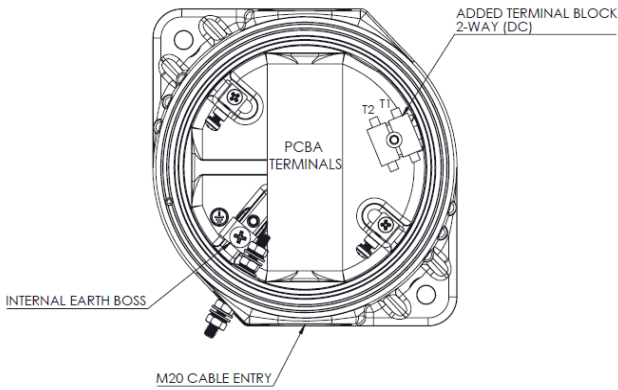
DC Entry Unit (Beacon 1) Internal Detail & Terminal Block
